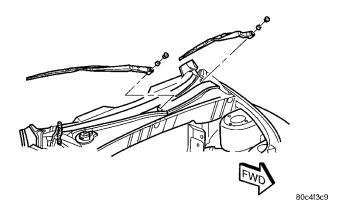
FRONT WIPER ARM - REMOVE/INSTALL
